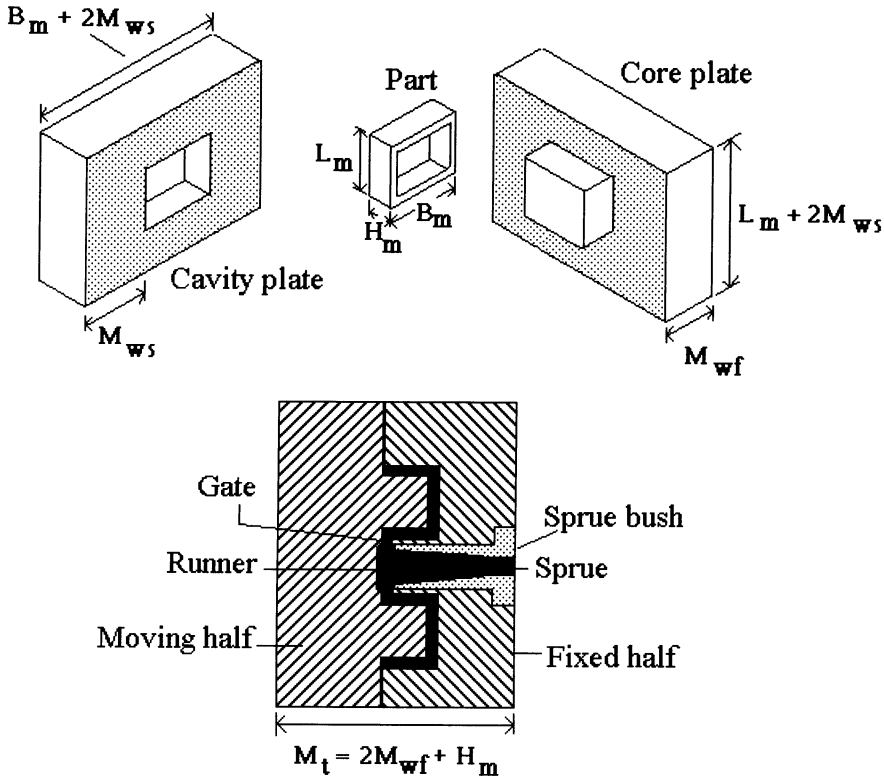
Mold dimensions for two-plate mold.
